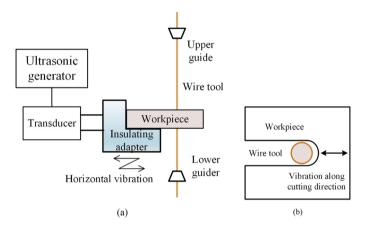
Schematic diagrams of ultrasonic vibration systems: (a) Vibration applied to the workpiece. (b) Cross-section of wire tool and workpiece.
